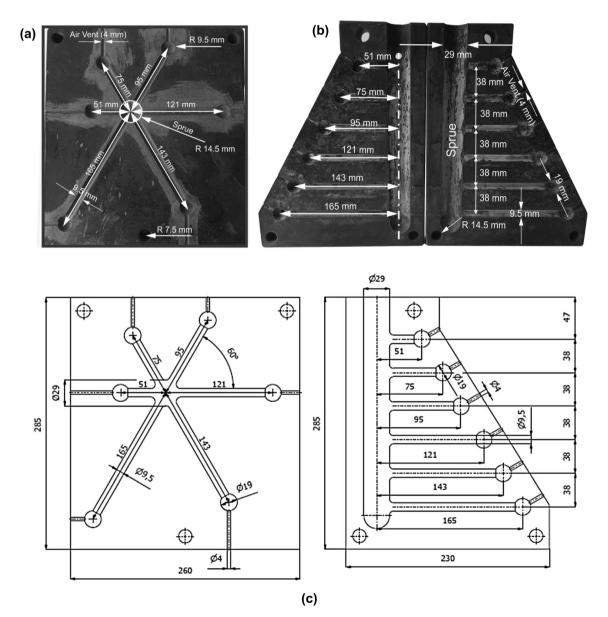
Dimensions of the CRC mold (a) horizontal mold, (b) vertical mold and (c) the details of the geometry of the two molds in mm.
